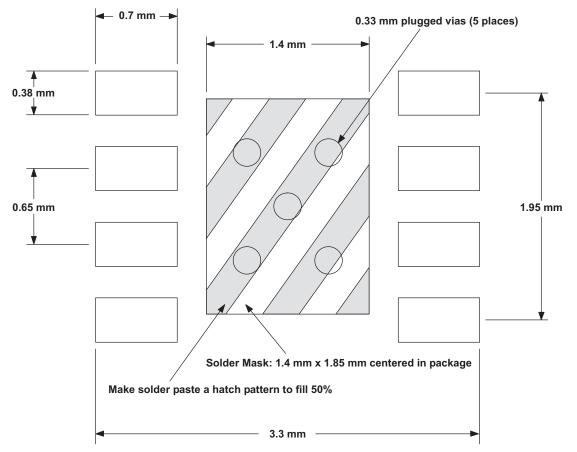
TPA6203A1 8-Pin QFN (DRB) Board Layout (Top View)
